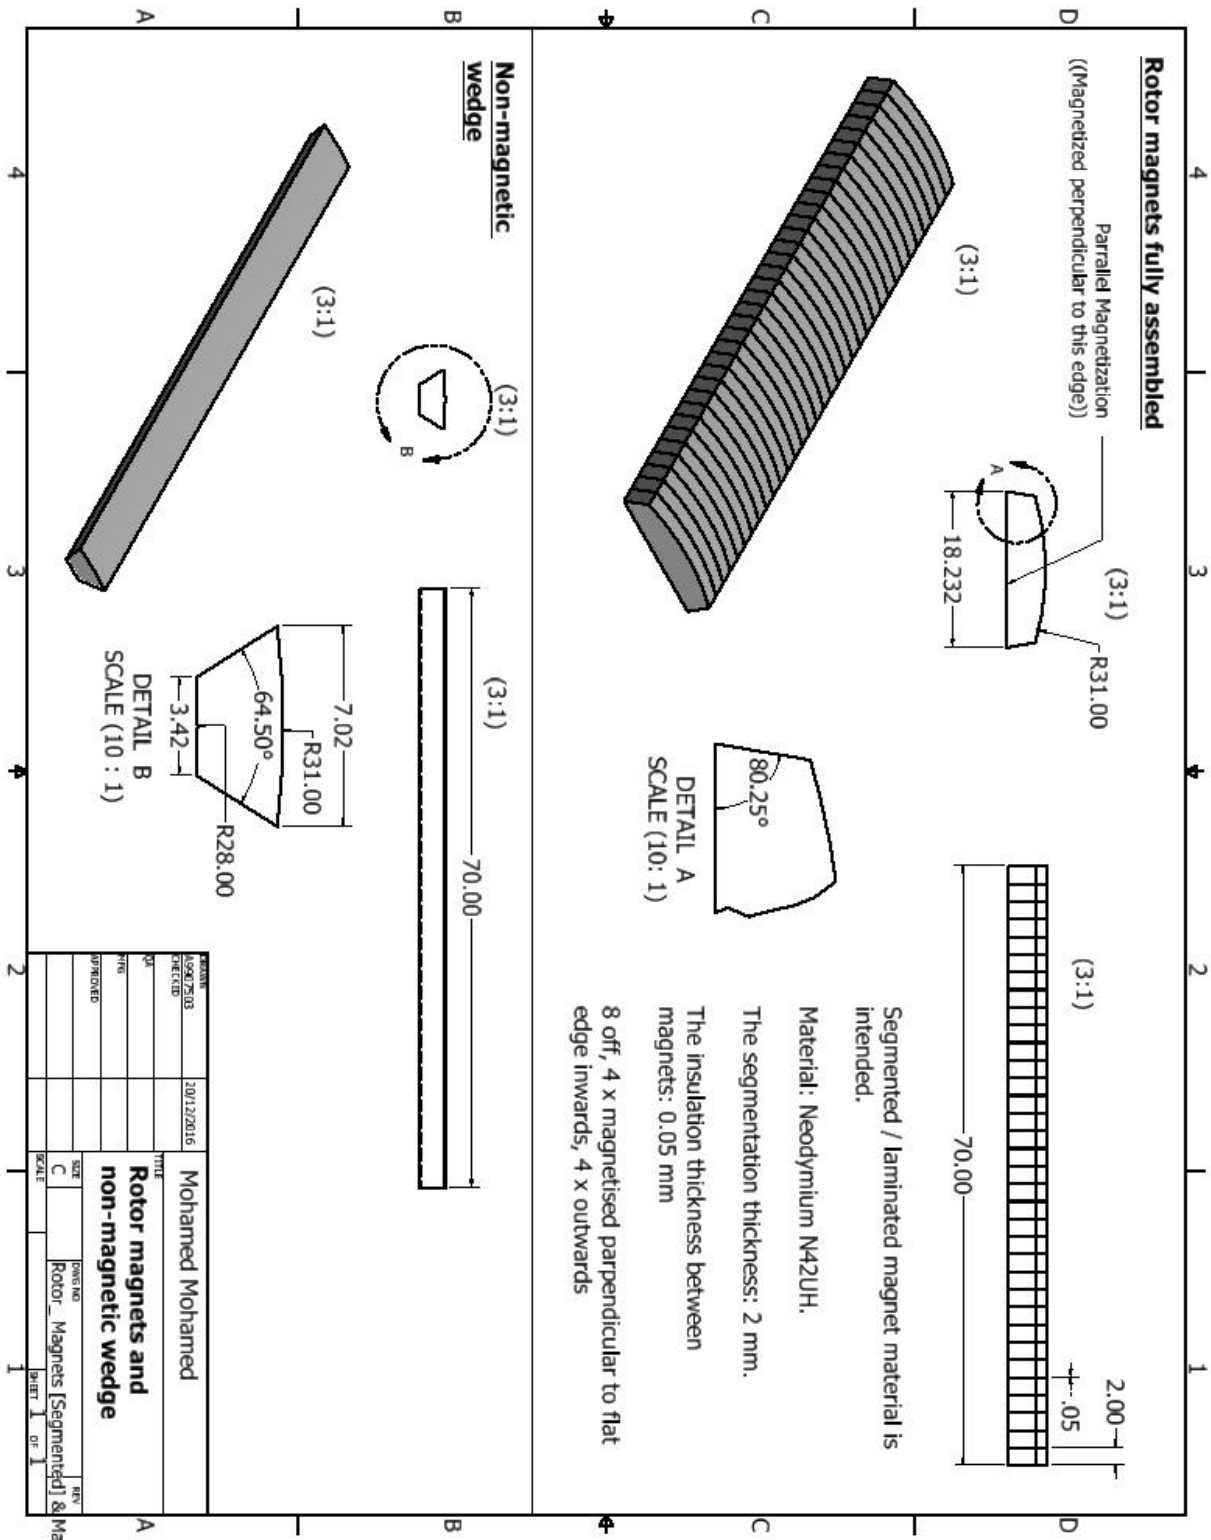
Drawings of rotor magnets and non-magnetic wedge
